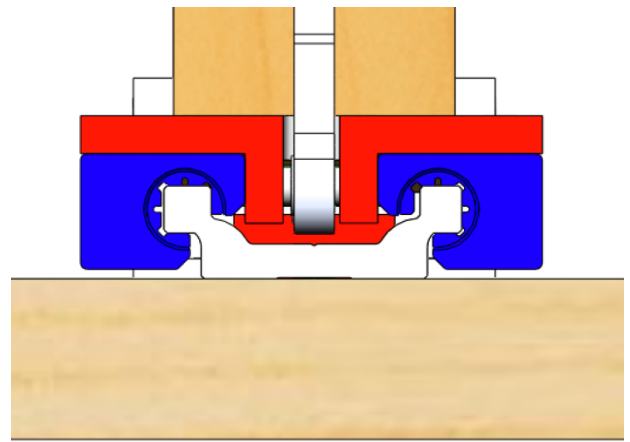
BEARING, RAIL AND LEG ASSEMBLY
